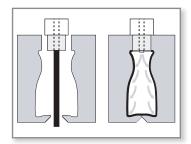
In extrusion blow molding, a molten tube of plastic is extruded into a mold cavity and inflated with compressed air
